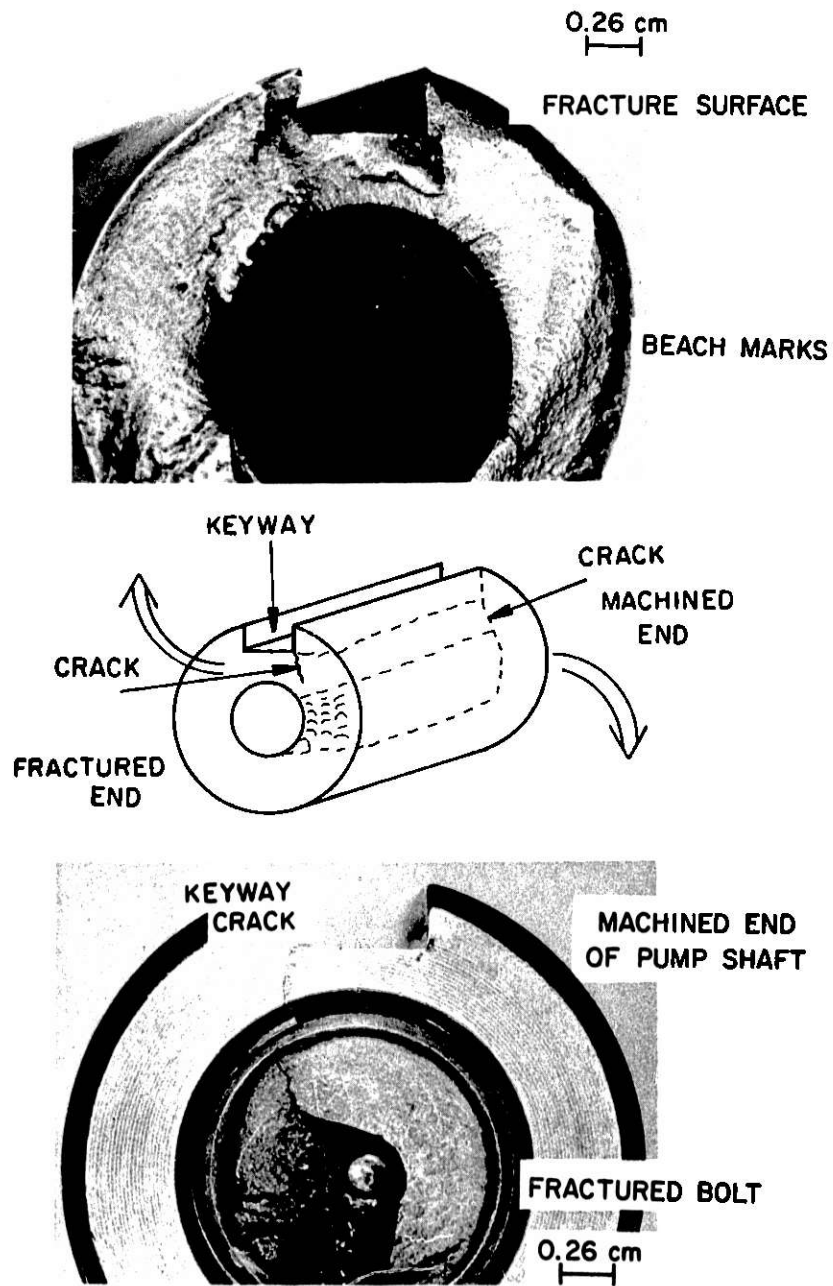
The Fracture and Machined Surface of the Pump Shaft. The keyway crack is visible in the photographs. ANL Neg. No. 306-78-43.
